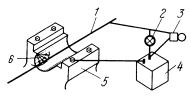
Circuit arrangement for the adjustment of bearing pedestals 1—stretched wire insulated at points of attachment; 2—lamp; 3—bell; 4—4- or 6-V storage cell; 5—bearing pedestal; 6—internal micrometer
